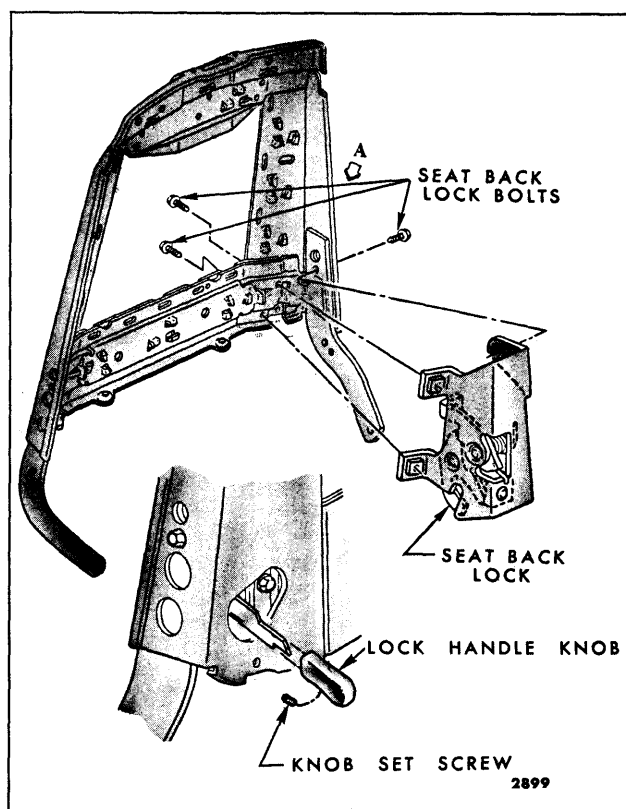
Front Seat Back Lock - "F & Z" Standard Bucket Seats
